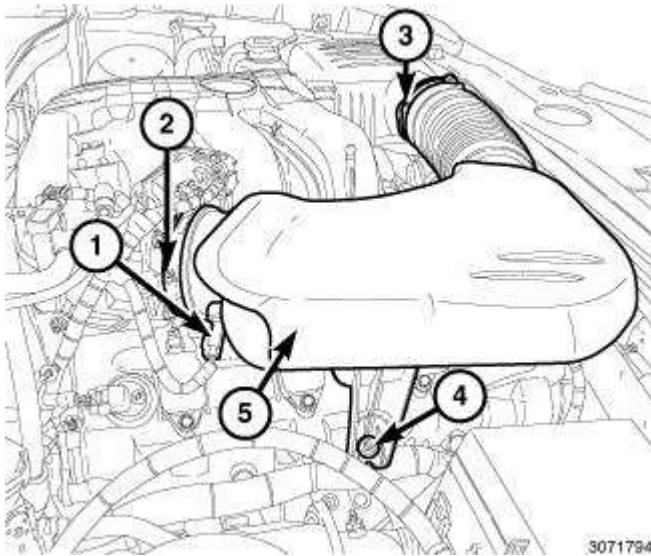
Inlet Air Temperature (IAT) Sensor Electrical Connector, Air Inlet Hose Assembly & Fasteners
